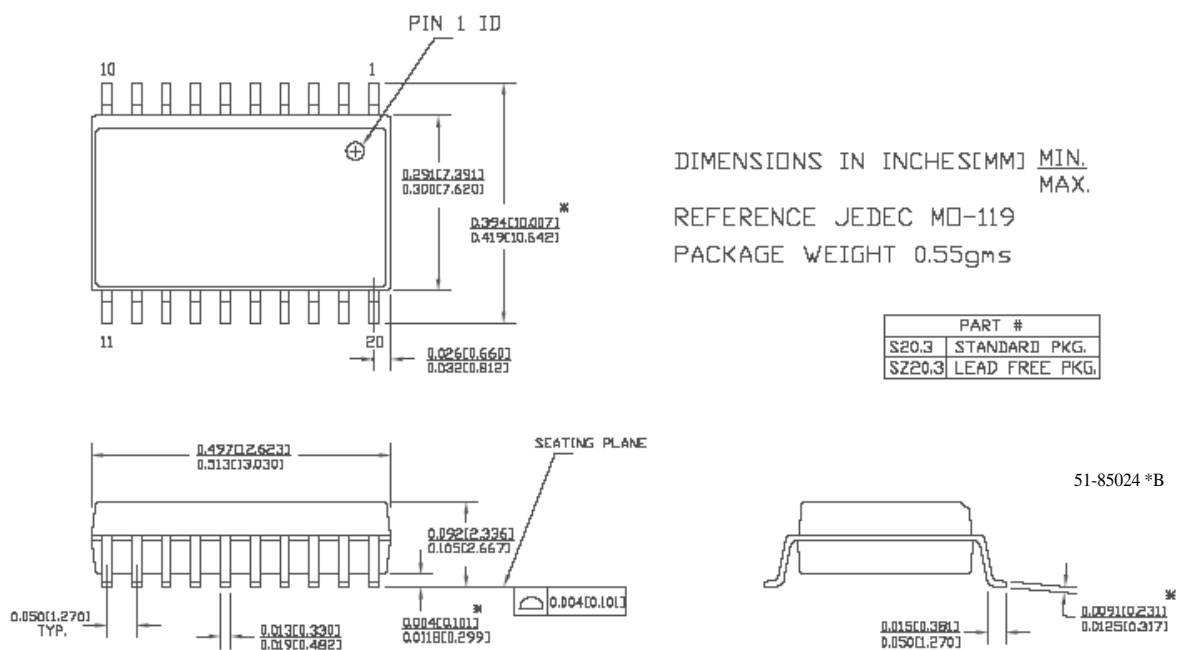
20-Lead (300-Mil) Molded SOIC S5
